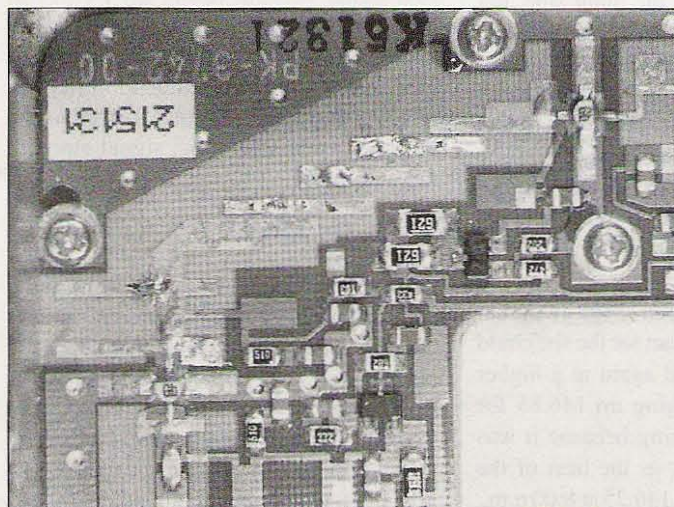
Photo B. Close-up of filter modification length adjustment soldered onto PC board with same-width copper strip to extend length of 1/2-wave filter.
